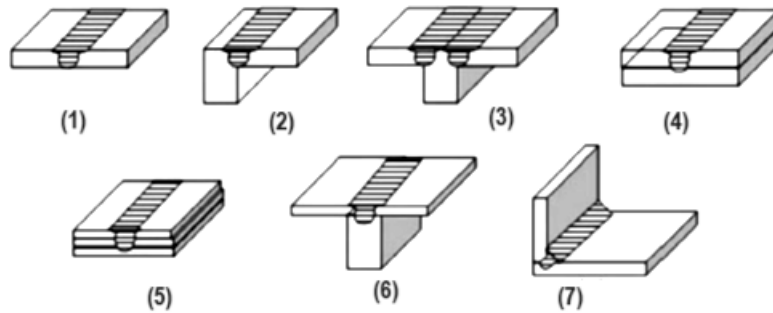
FSW joint configurations: (1) square end-to-end, (2) edge end-to-end, (3) T end-to-end joint, (4) lap joint, (5) multiple lap joint, (6) T lap joint, and (7) fillet joint [5]
